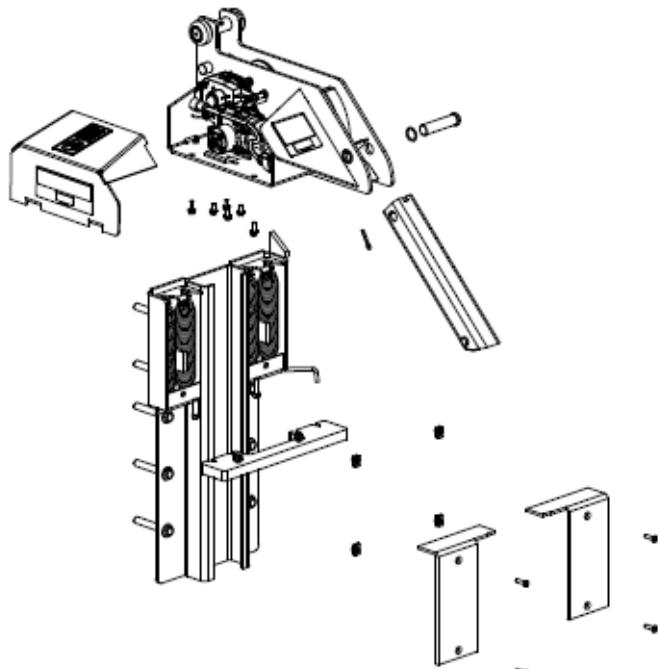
INSTALL CARRIAGE ASSEMBLY INTO ROLLER TRACK
